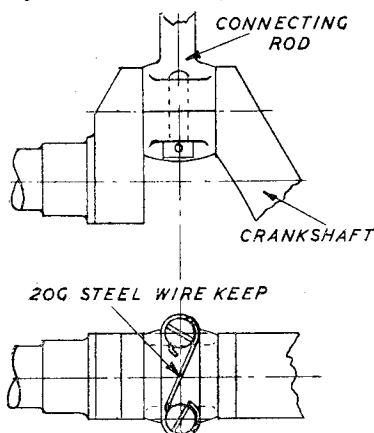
Use of steel wire keeps to secure crankpin bearing screws
